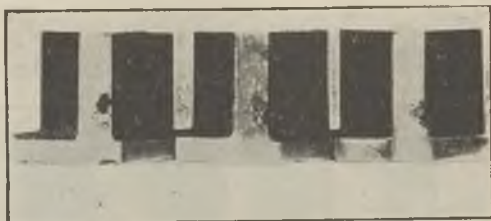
THE MIDDLE CASTING HAS SIMILAR COMPOSITION TO FIG. 7, BUT 0.25 PER CENT. MO. HAS BEEN ADDED. AT THE RIGHT HAND IS A HIGH Si AND P. IRON CASTING.
